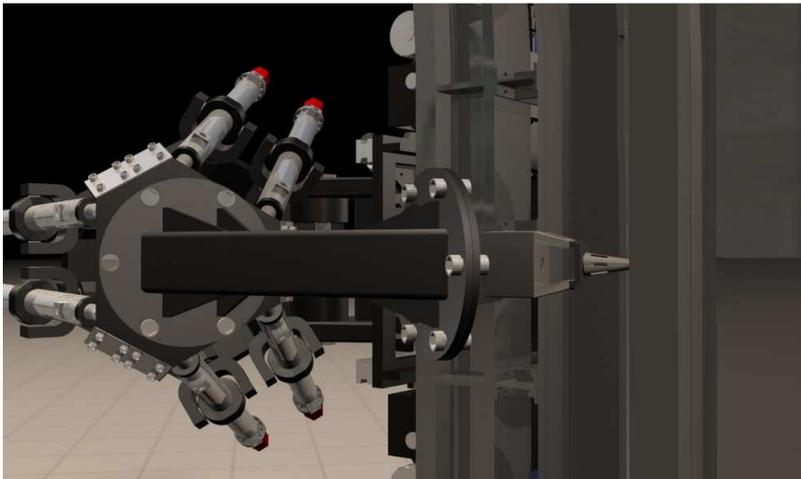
Intersector Welding Robot with welding head. (LUT, H. Handroos)
